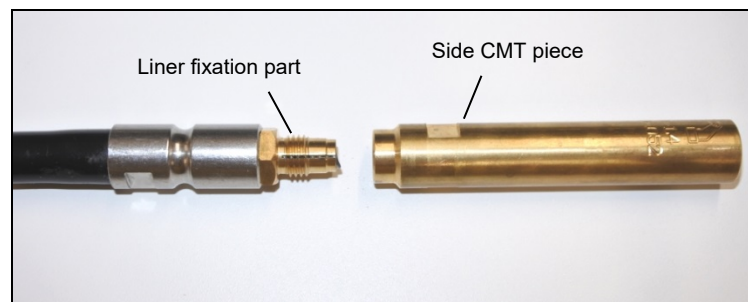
(b) Side CMT piece and liner fixation part
